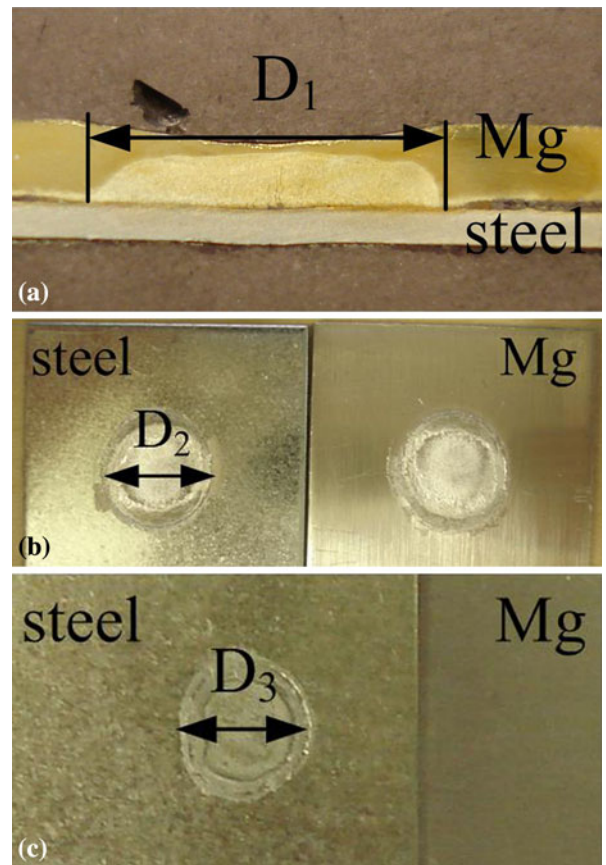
Measurements of weld dimensions by the following different methods: (a) cross section of weld, (b) fracture surface, and (c) melted zinc at steel–electrode interface.
